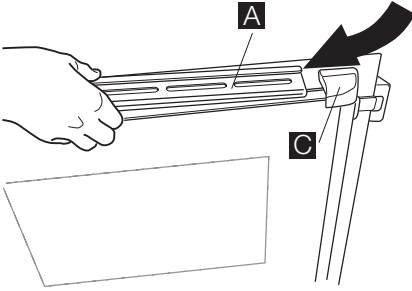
Pull the perforated aluminium plate "A" out of the retainer "C".
